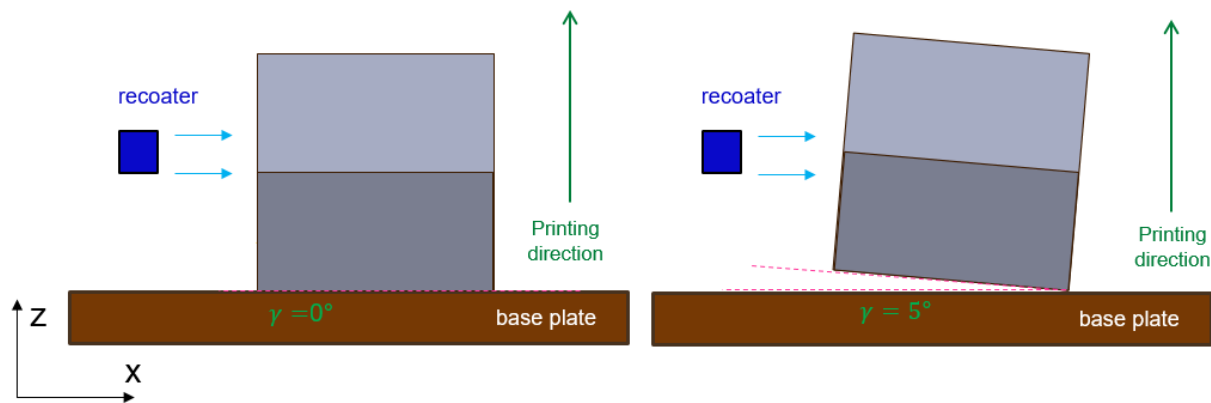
Side view of Figure 4-19 showing the effect of angle γ during the printing (manifold openings are omitted to simplify the drawing)
